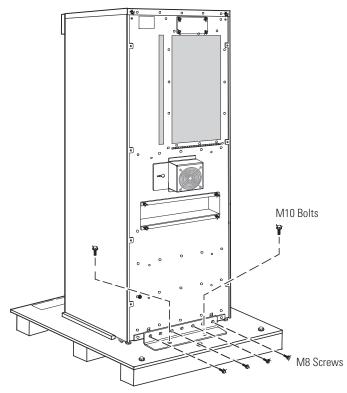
Removing the Rear Shipping Bracket (UPS Shown)
